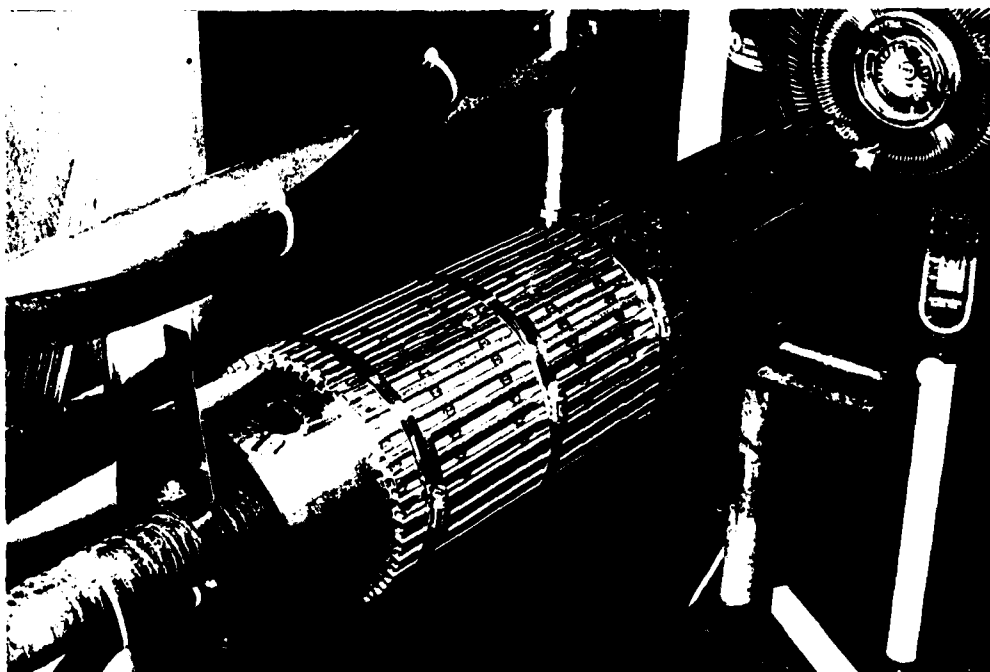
SPOT WELDING OF CORRUGATED FIN MATERIAL TO TUBE #2
